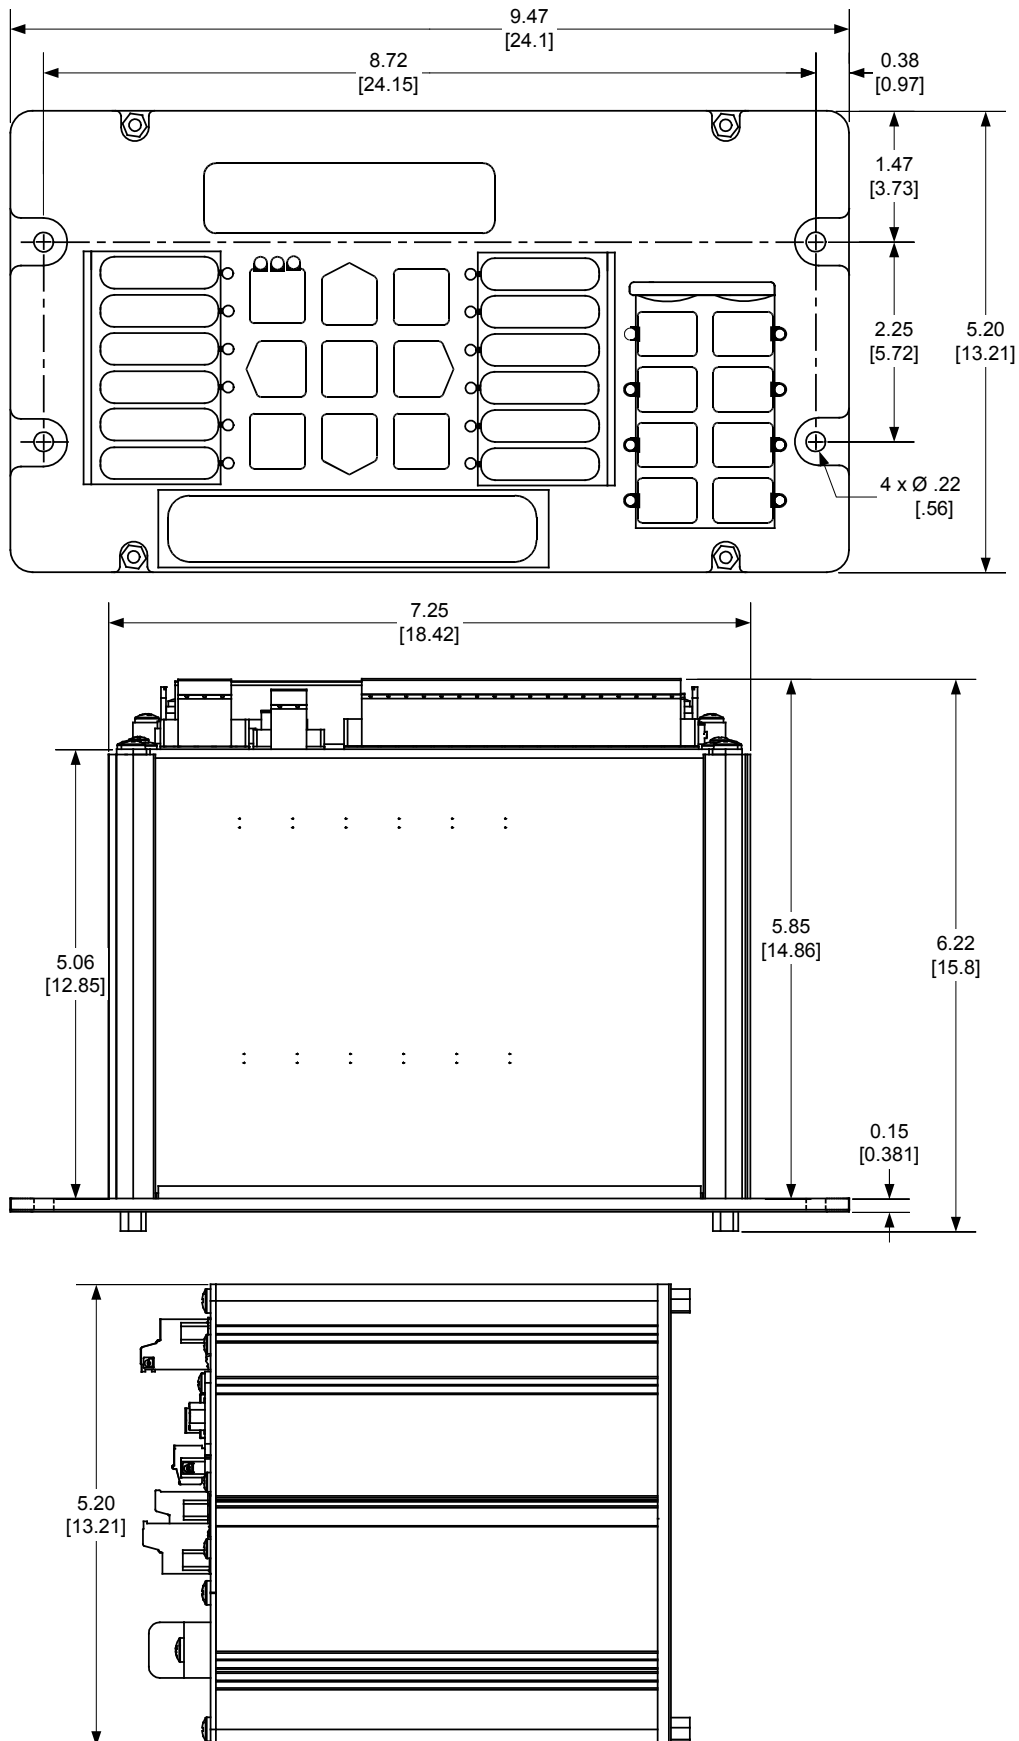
M-7651A D-PAC Horizontal Model Mounting Dimensions
